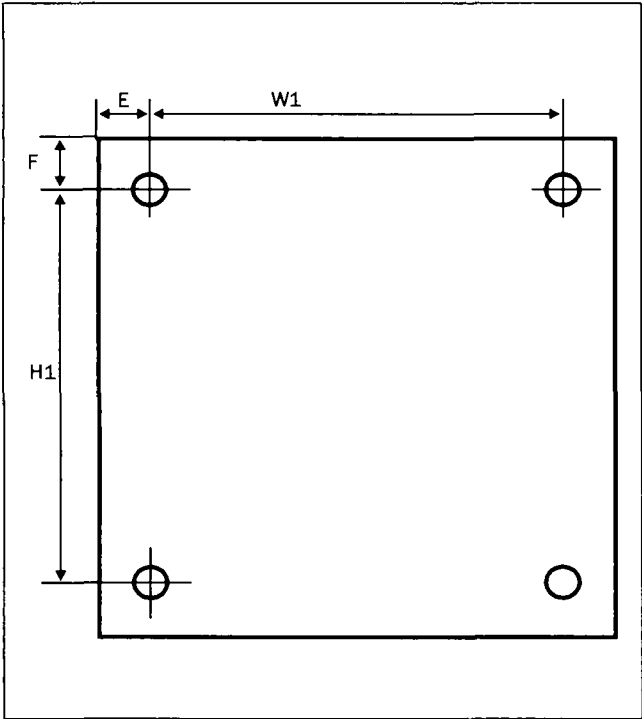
Hole pattern for screw attachment, MSF-310 to MSF-835. Hole distance (mm).
